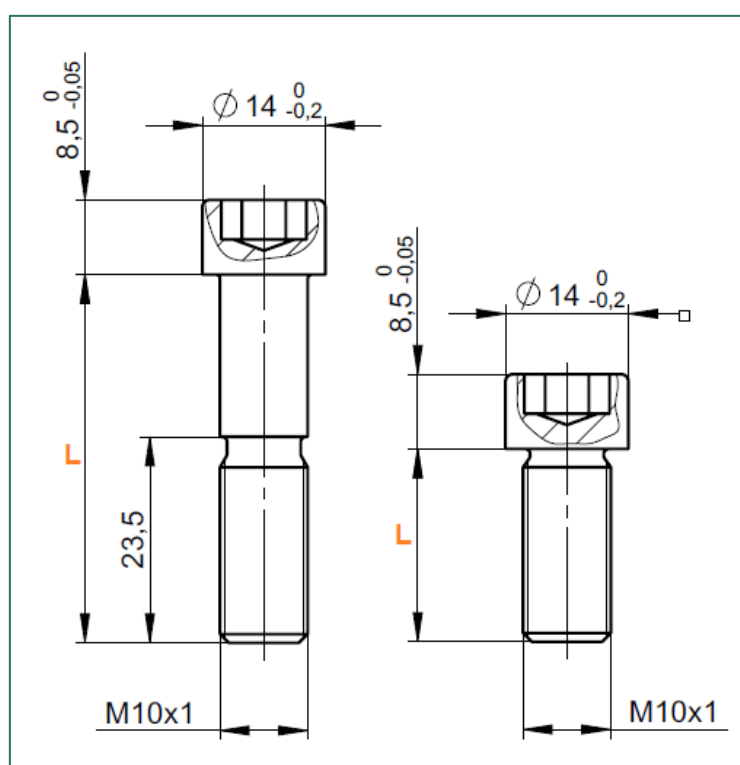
DIMENSIONS OF THE MUTARS® SCREW; THE SCREW OF THE SMALLEST SIZE M10X25MM (AT THE RIGHT PICTURE)
